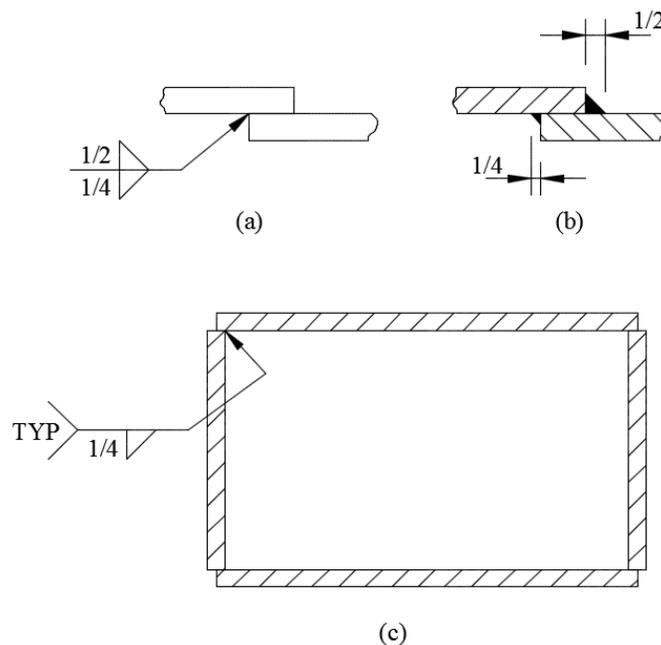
Fillet weld size examples (a) weld symbol (b) resulting weld (c) usage of welding tail and typical callout for multiple welds
